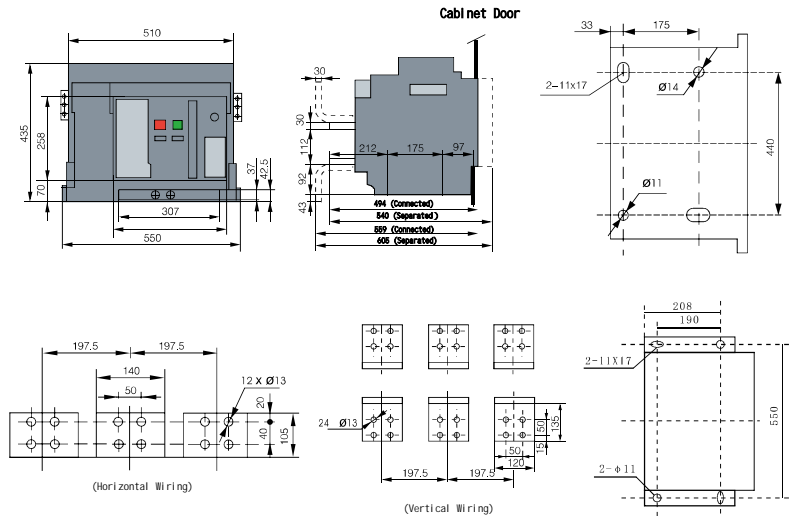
Installation and Outline Dimensions of Drawer-Type Circuit Breaker (XLDW1-4000)
